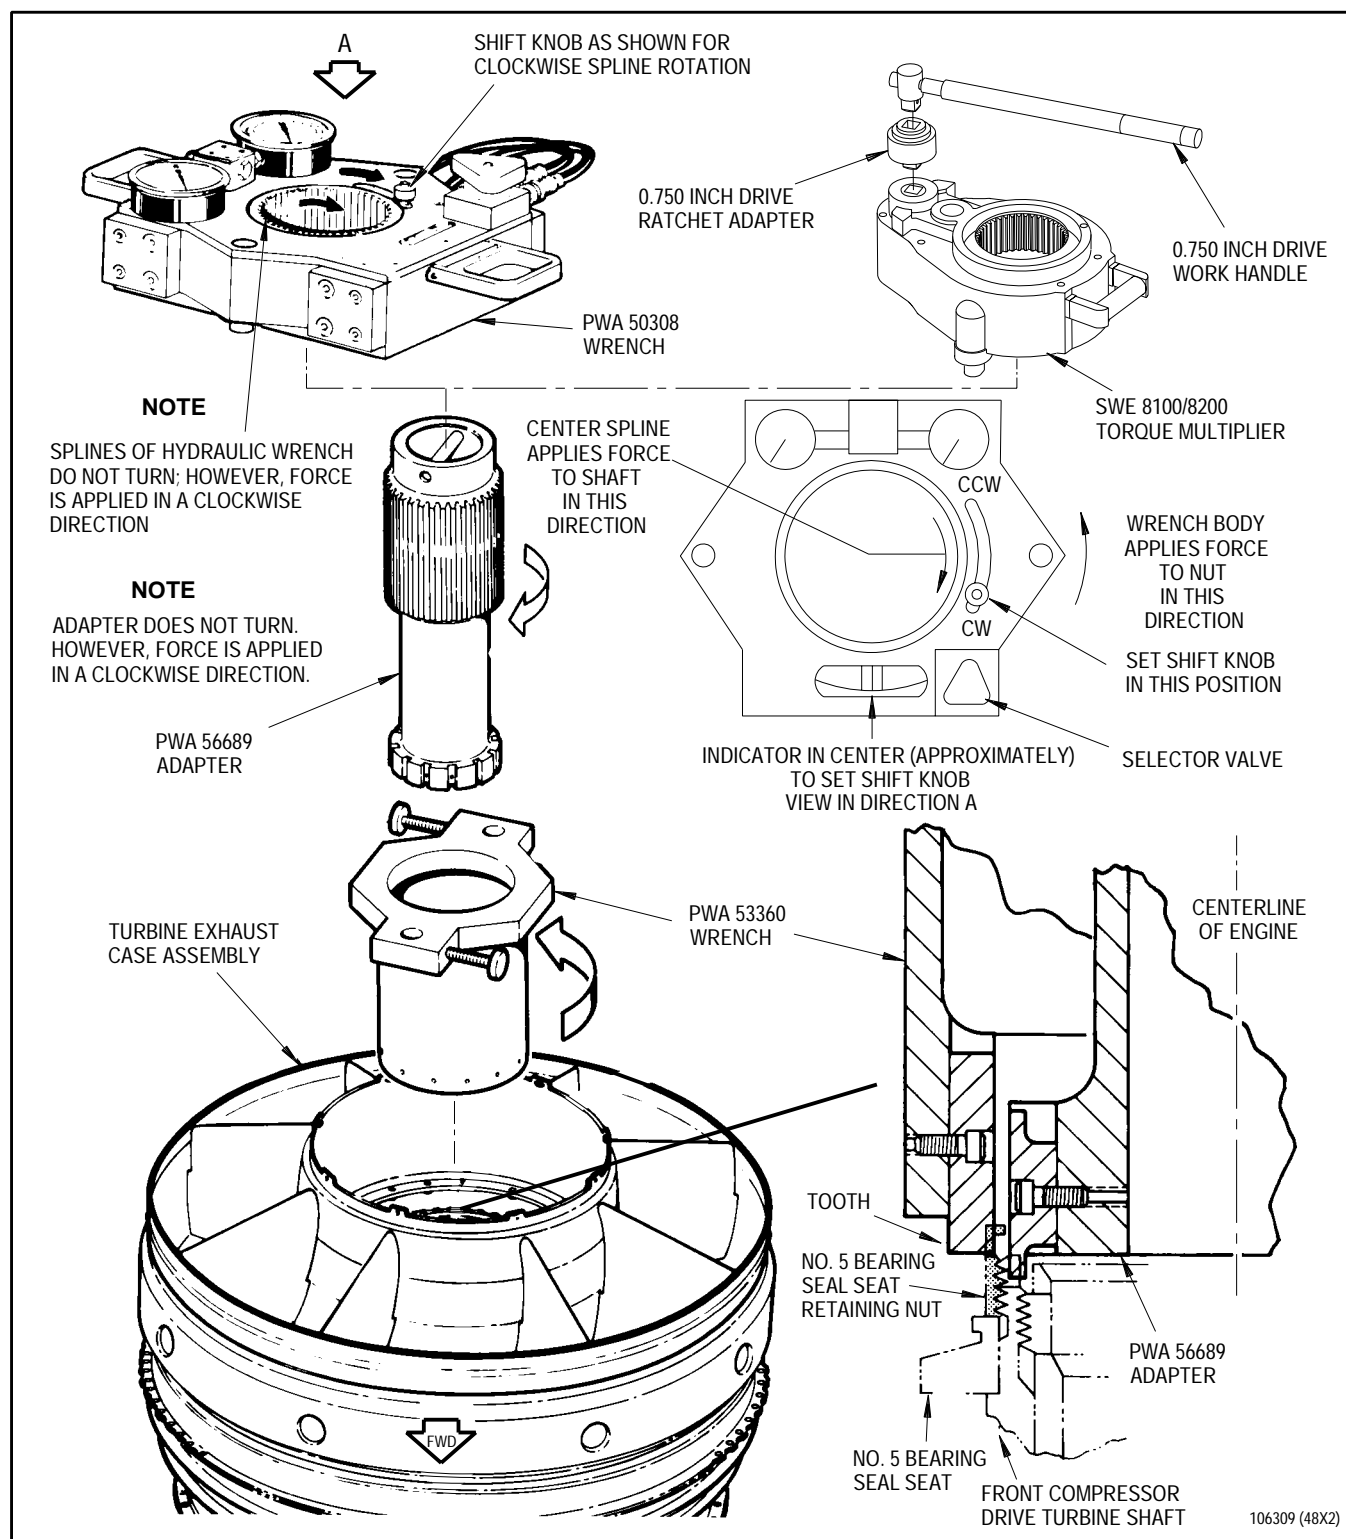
No. 5 Bearing Seal Seat Retaining Nut - Removal (Sheet 2 of 2)
